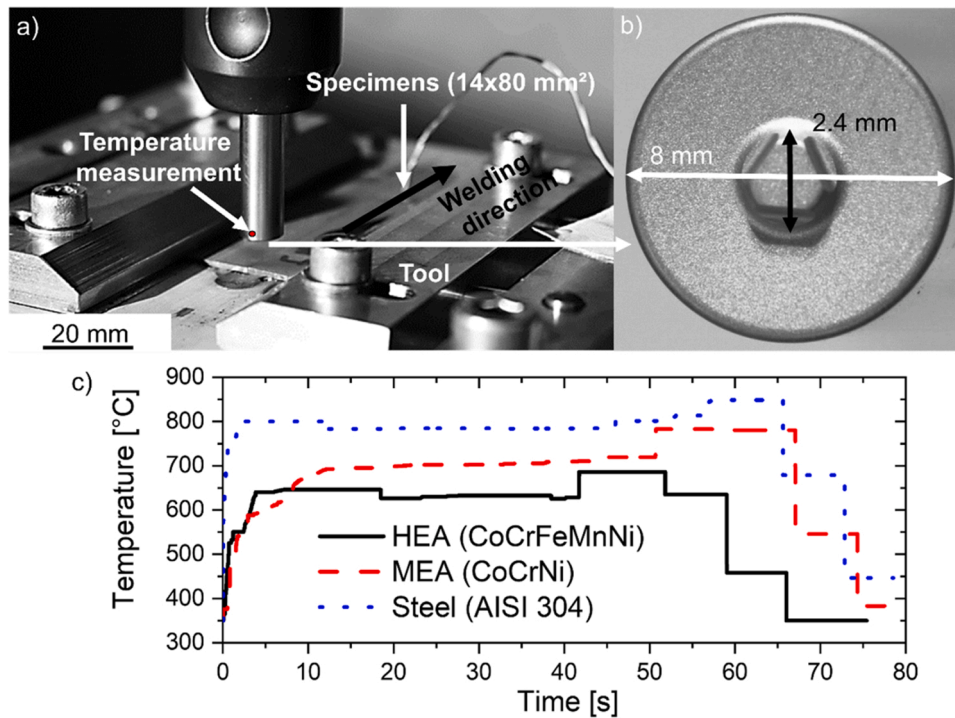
a) photo of the experimental setup for the friction stir welding carried out in this work [60]; b) bottom view of the tool used; c) measured temperature profiles from the thermocouple inserted in the welding tool as indicated in a).
